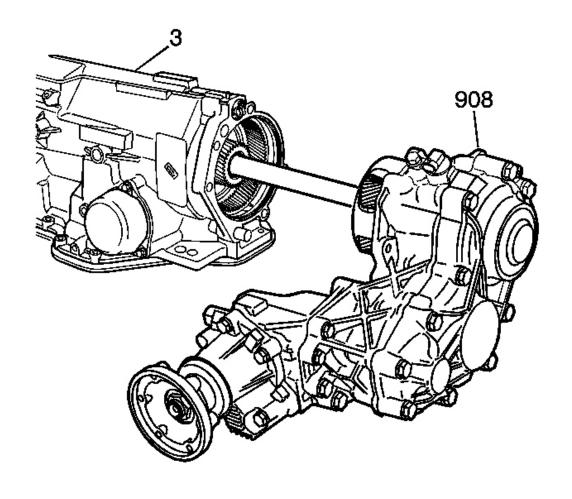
Removing Transfer Case Assembly From Transmission Case Courtesy of GENERAL MOTORS CORP.
